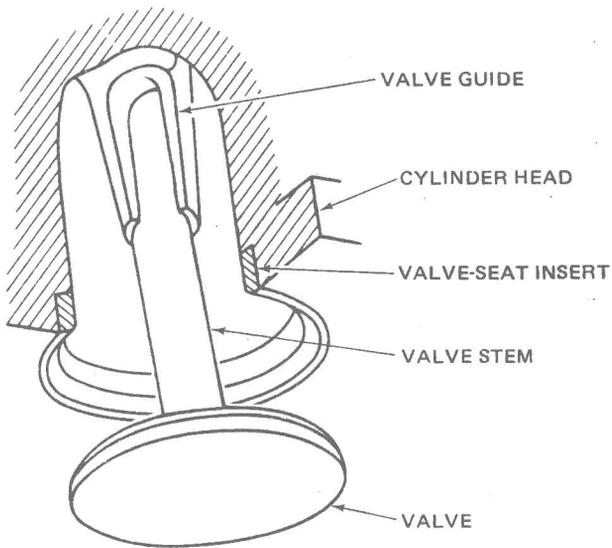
Valve and valve seat in a cylinder head. The cylinder head and valve guide have been cut away so that the valve stem can be seen.
